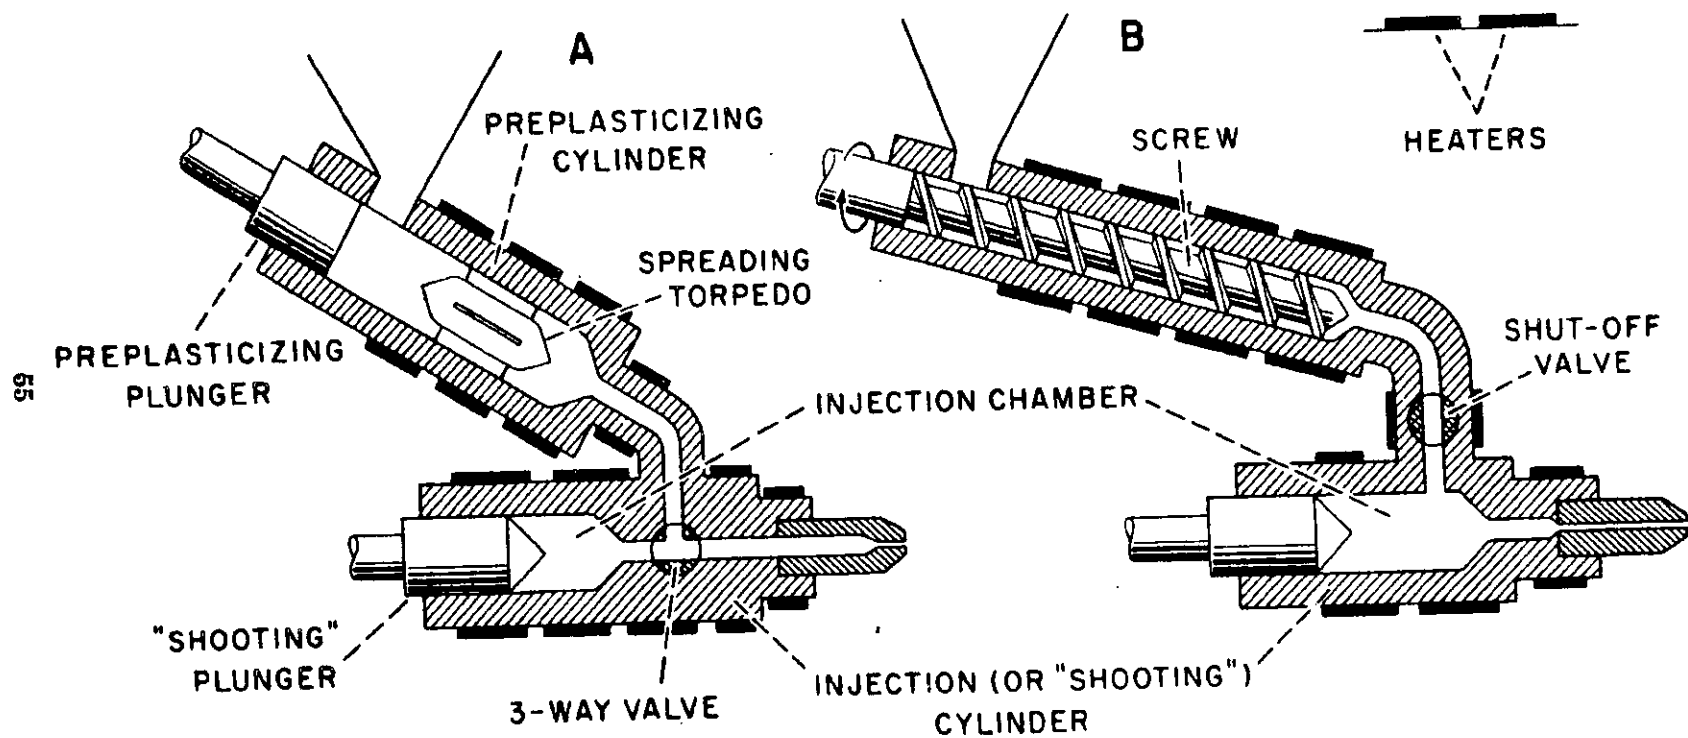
Schematic drawings of a plunger-type (A) and a screw type (B) preplasticizer at plunger-type injection molding machines.
